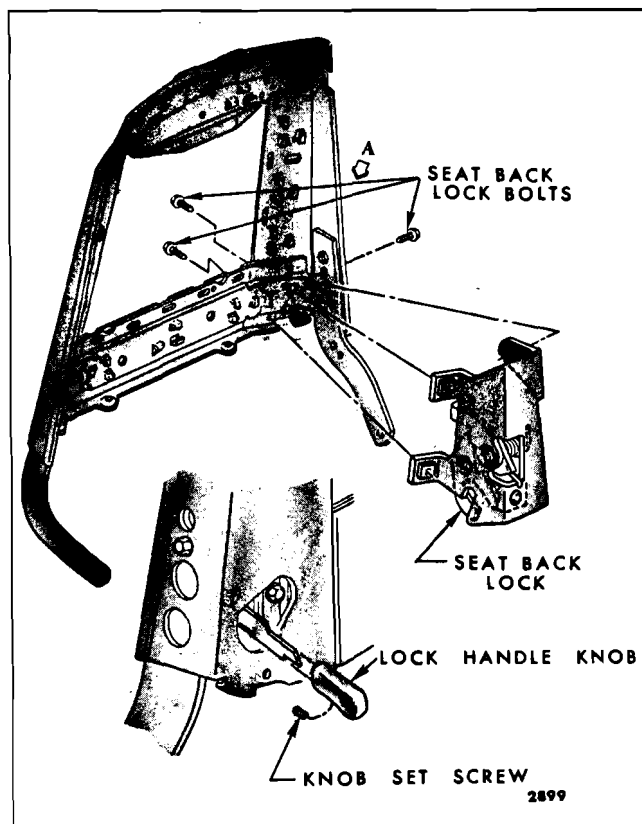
Front Seat Back Lock - "F & Z" Standard Bucket Seats
